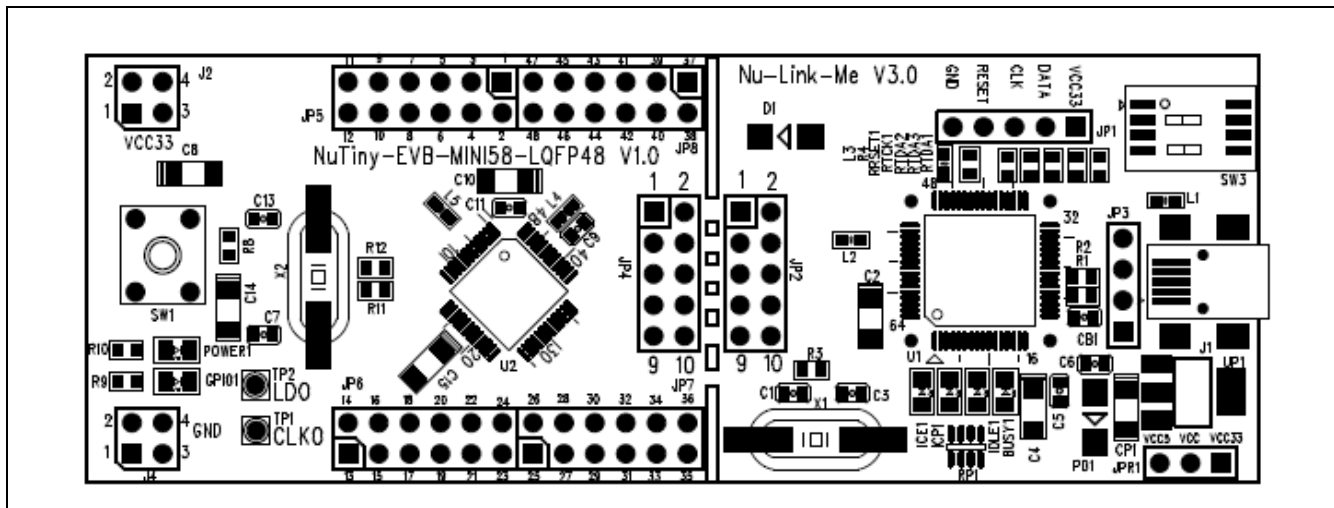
NuTiny-SDK-Mini58 PCB Placement
